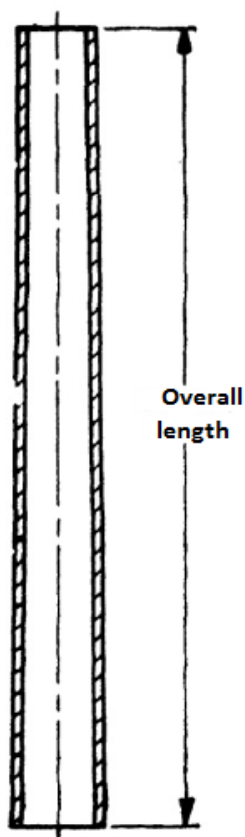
A TYPICAL OPEN TOP WARP TUBE
